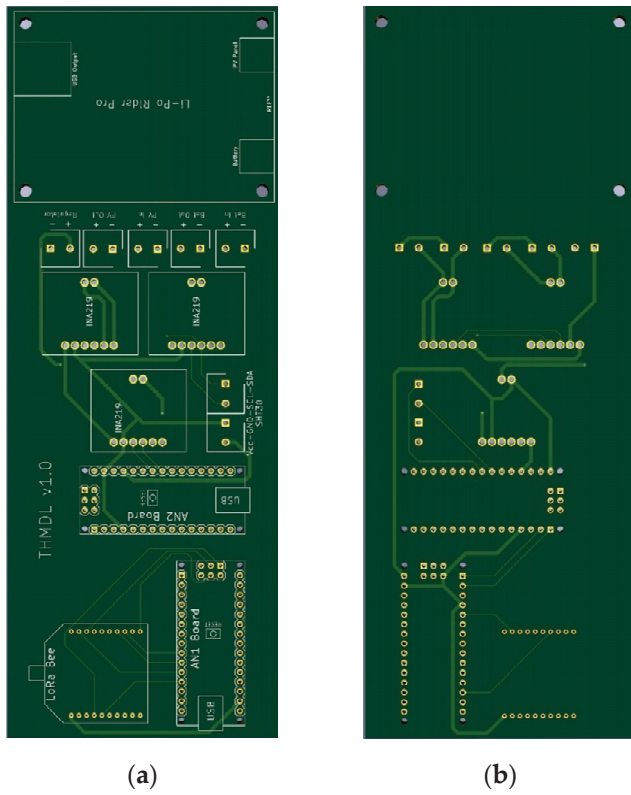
PCB of the THMDL with battery and solar panel power supply: (a) front side and (b) back side.
